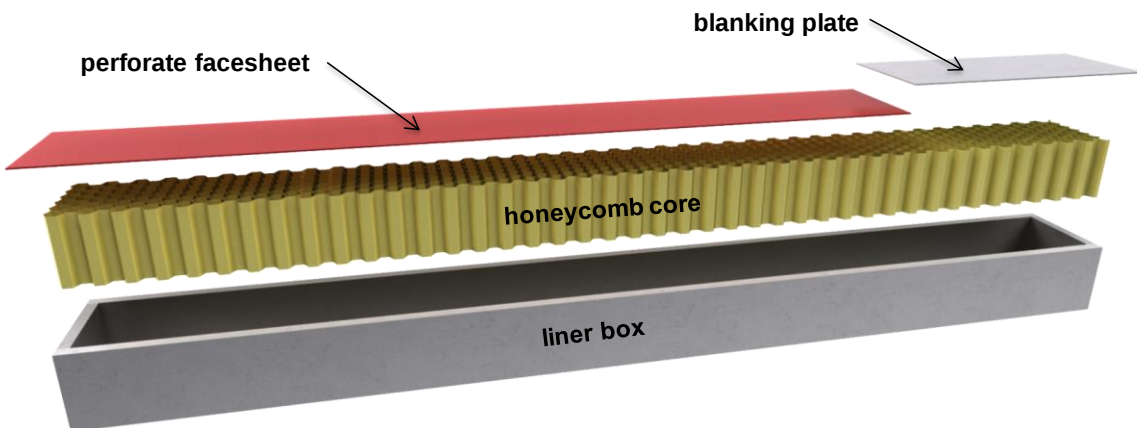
Liner sample facesheet and filler blank overlaid on core cavity with internal honeycomb.
